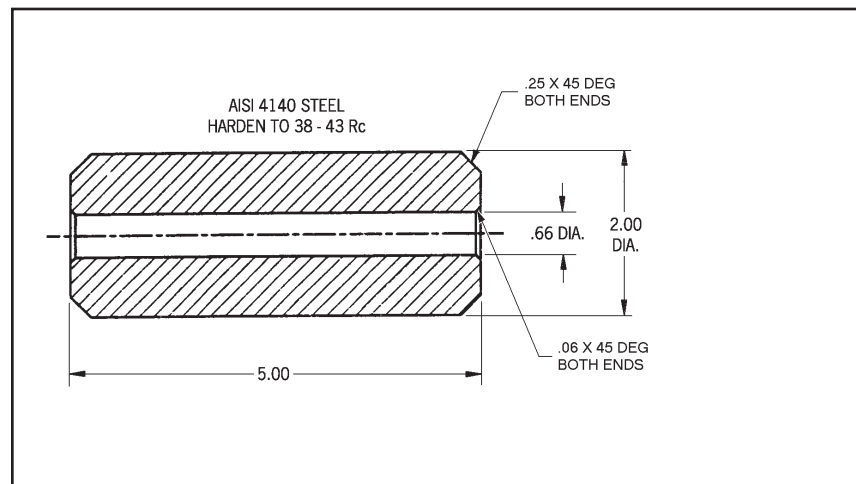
Hammer (1421460)–Used with puller 1421459.
